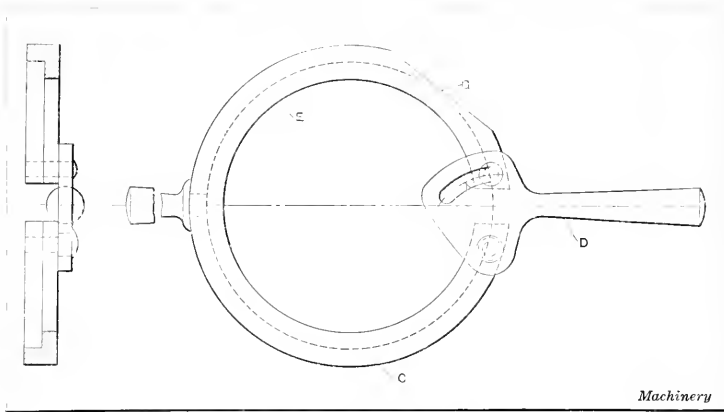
Rapid Retapping Wrench for tapping Thread on Ball Bearing Parts shown at A in Fig. 1
